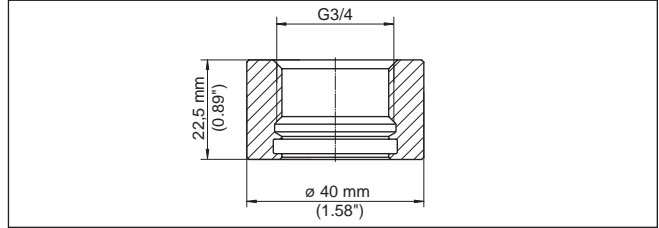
Dimensions of welded socket, thread G $\frac{3}{4}$ (ISO 228-1) - Hygienic design
